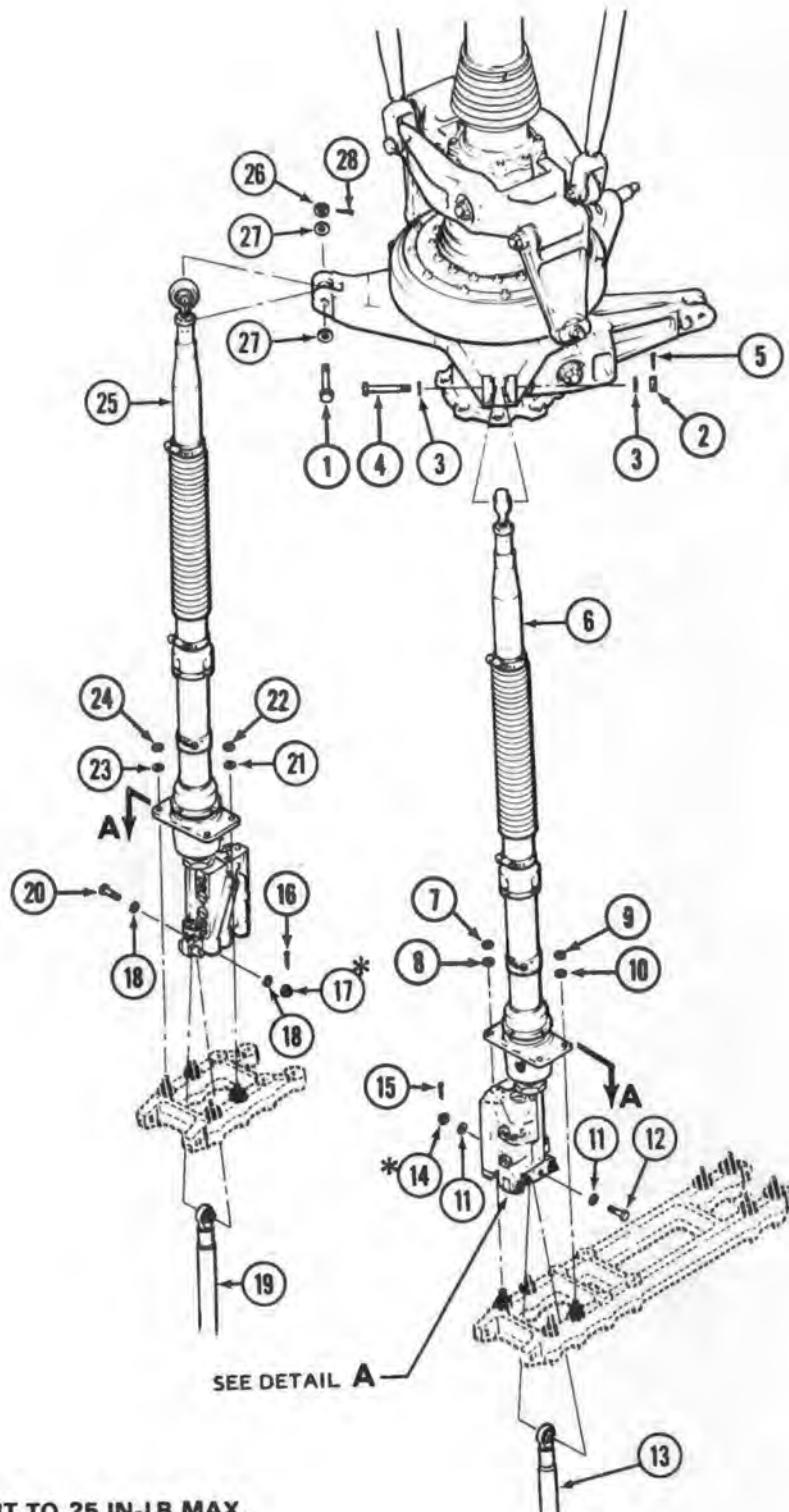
Hydraulic servo cylinder adjustment dimensions
